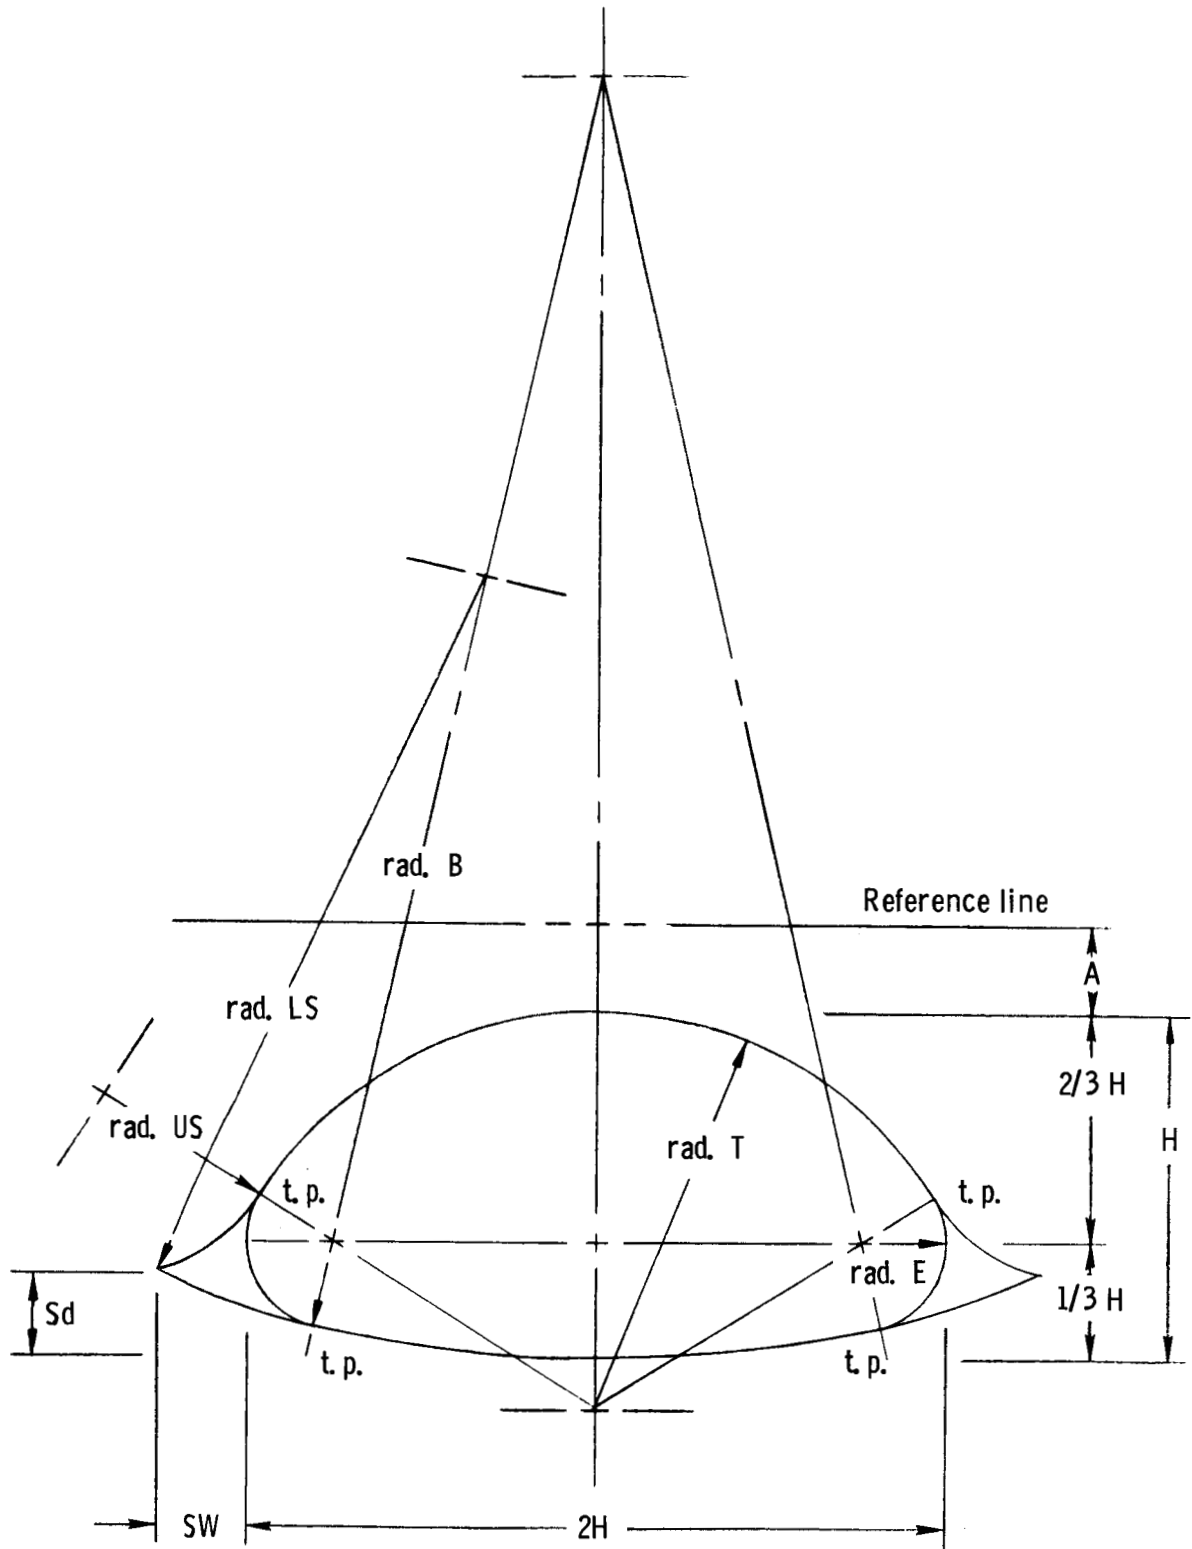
Detail of fuselage cross section and strake design. Dimensions are listed in table II.
